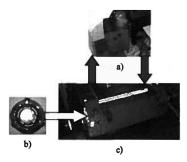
Lubrication system: a - lubrication block; b - tilting-pad journal bearing; c - rotary system
